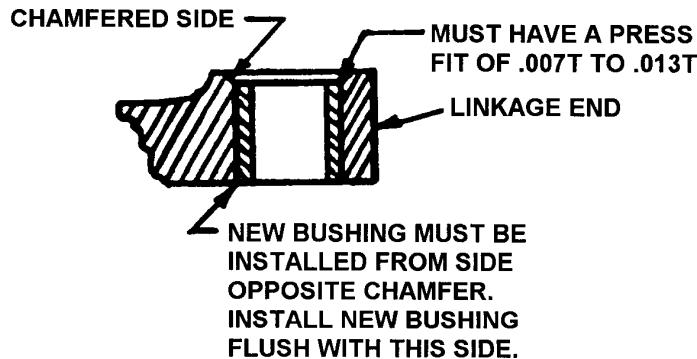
FUEL PUMP DRIVE COUPLING FITS AND LIMITS
